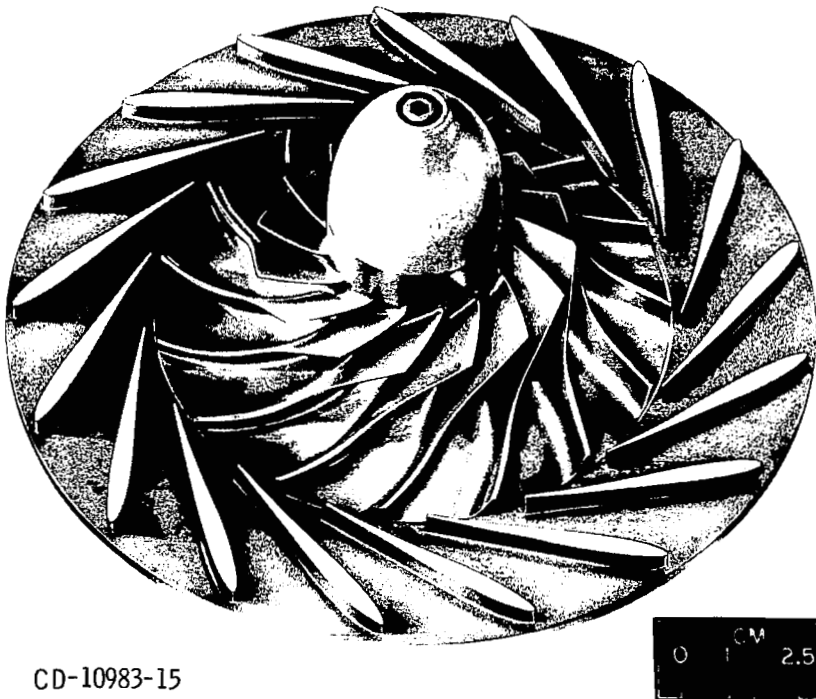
Compressor impeller and vaned diffuser. Impeller exit diameter, 10.8 centimeters (4.25 in.).
